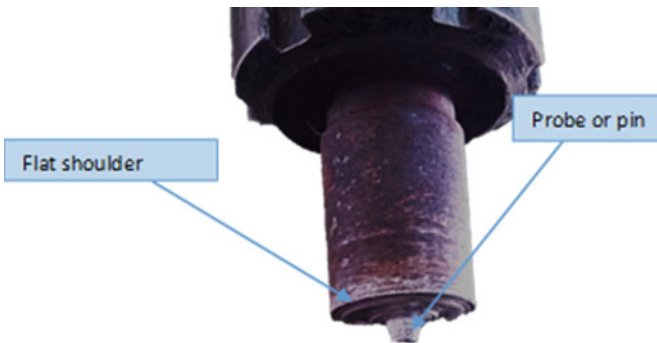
FSW tool—threaded pin and flat shoulder
